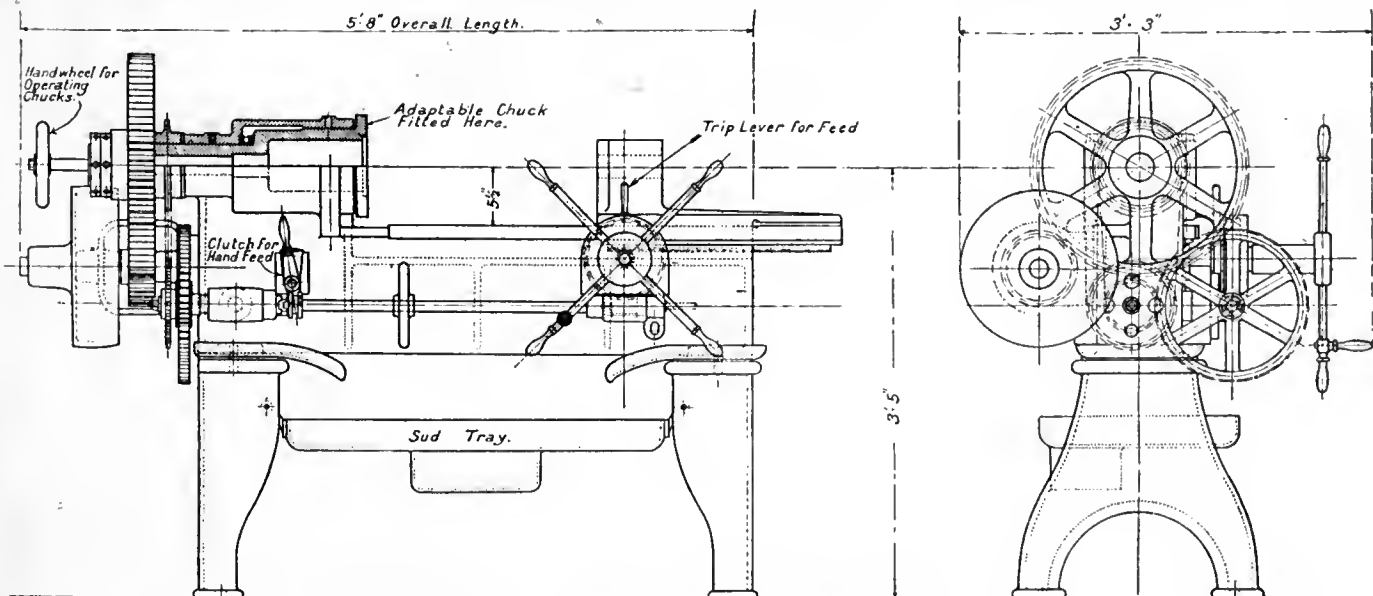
BORING LATHE FOR 4.5 IN. SHELLS.
